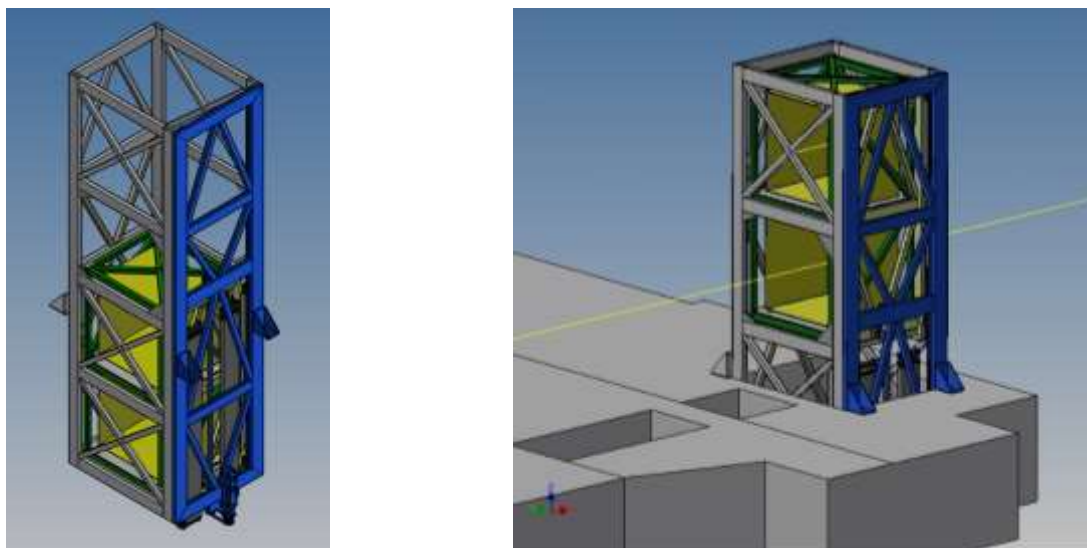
Left side: the elevator. Right side: the elevator mounted on the bench
